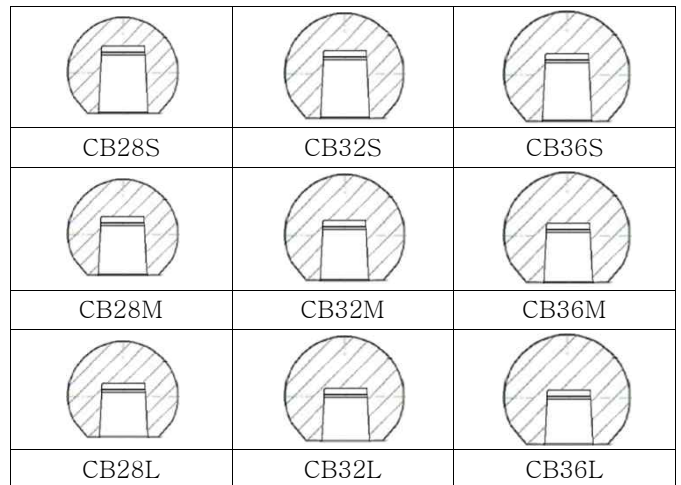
Drawing of Ball Heads(S, M, L/ 28,32,36)
